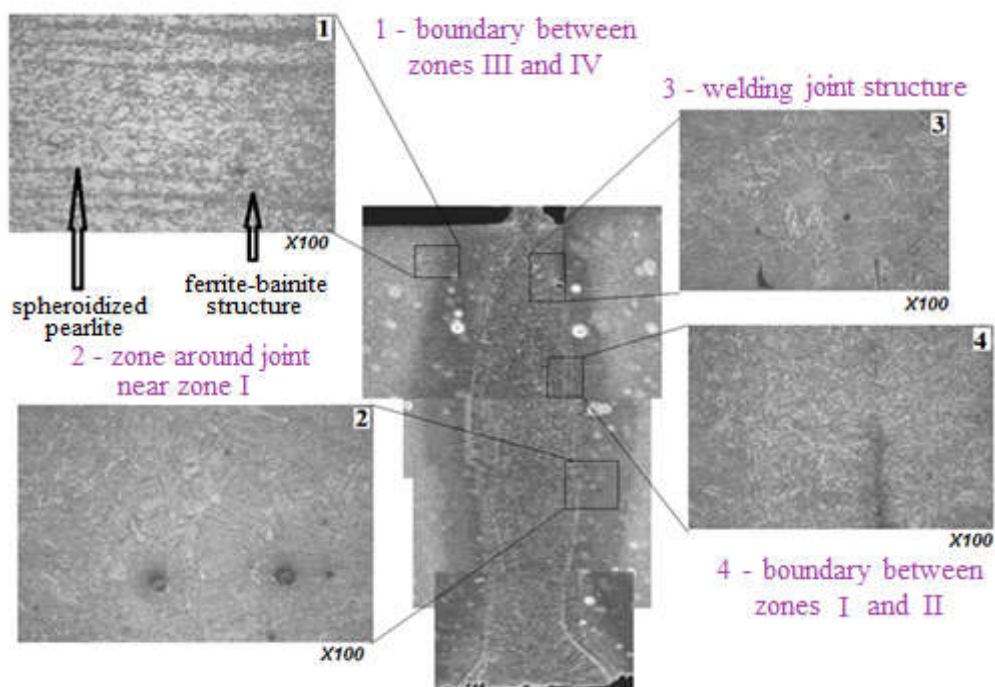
General appearance and structure of a welded joint of 09G2S steel after electron-beam welding
